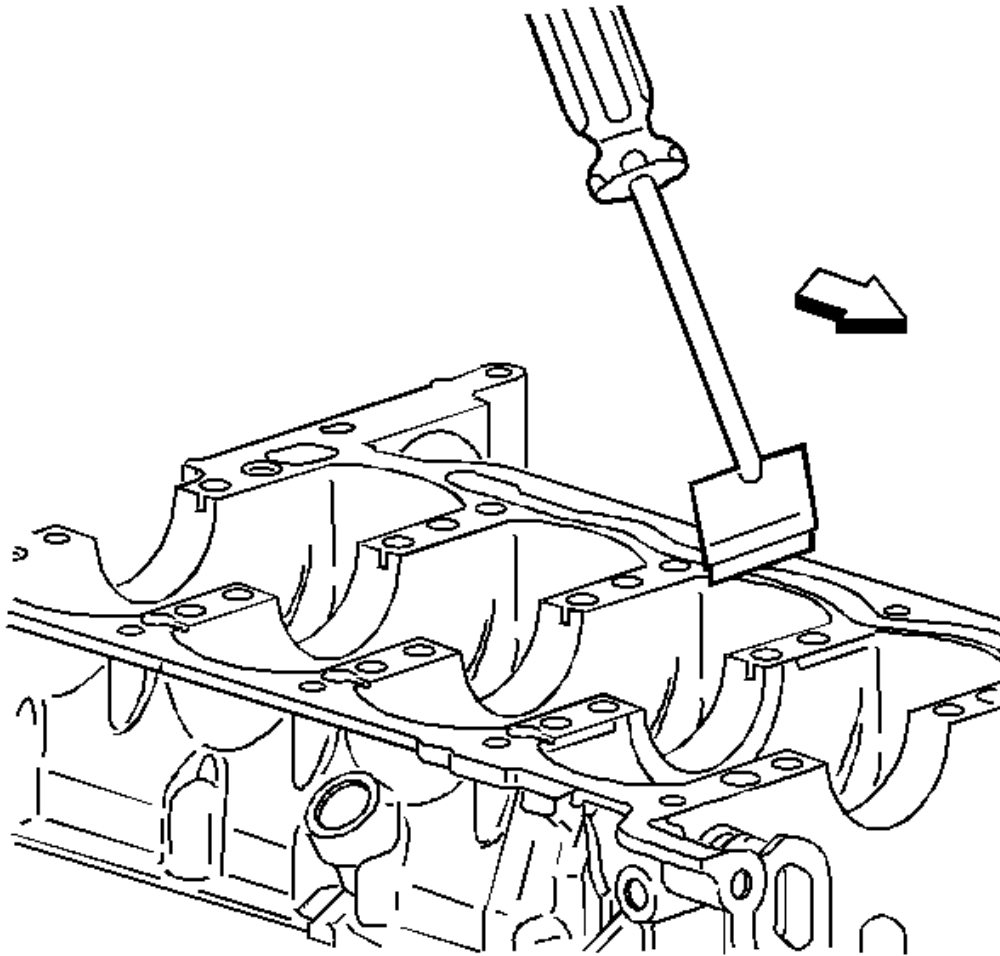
View of Gasket Mating Surfaces on Lower Crankcase Engine Block Side
